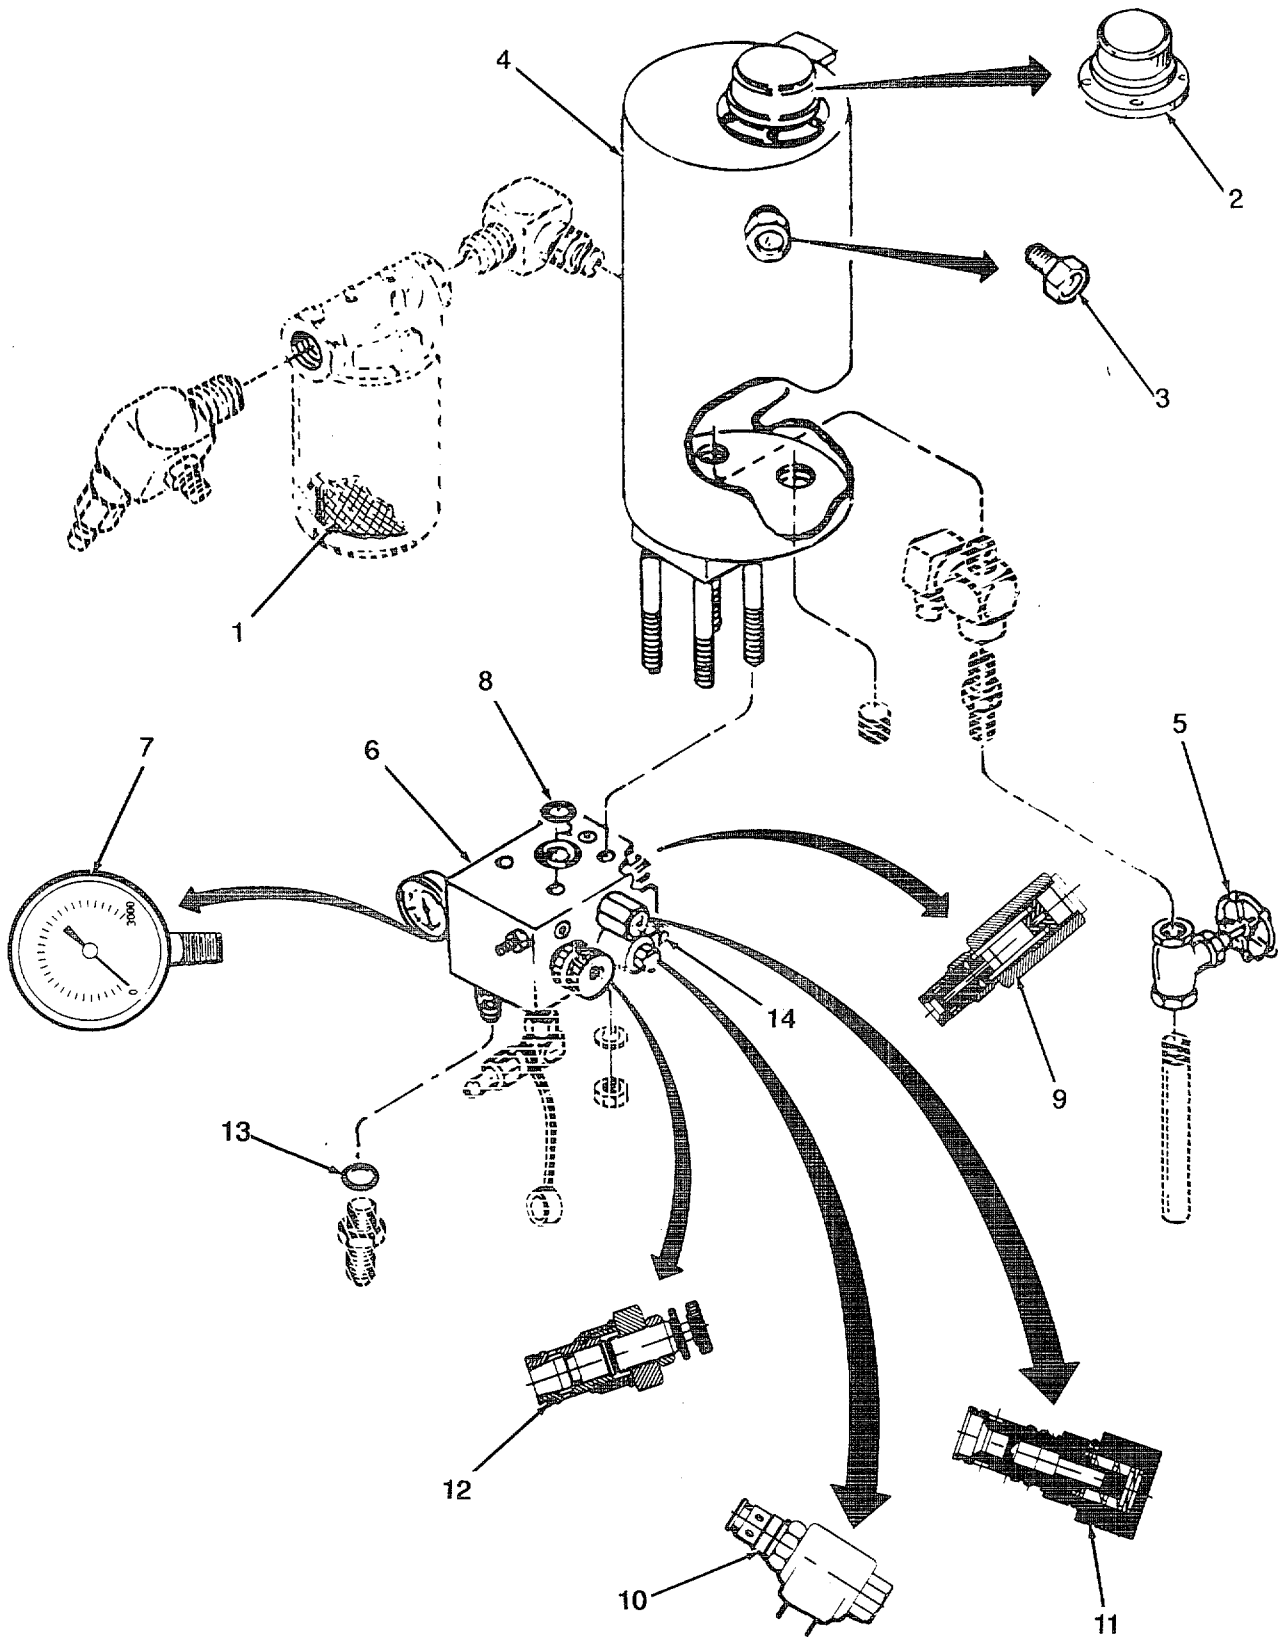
Hydraulic Reservoir and Primer Manifold Assembly
